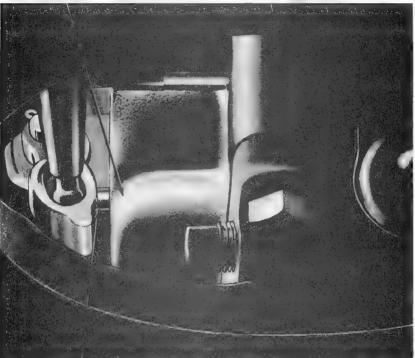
End of Intake Control Valve NOT FLUSH WITH PUMP HOUSING Fig. 70-End of Intake Control Valve Not Flush with Pump Housing
